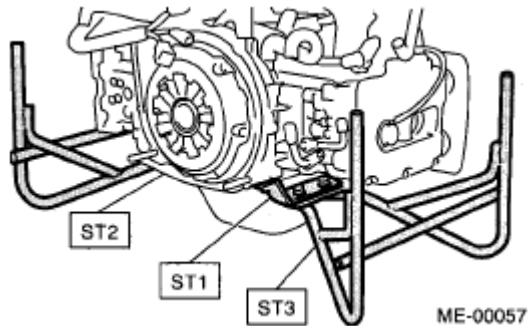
Identifying Engine Stand Adapters And Engine Stand
